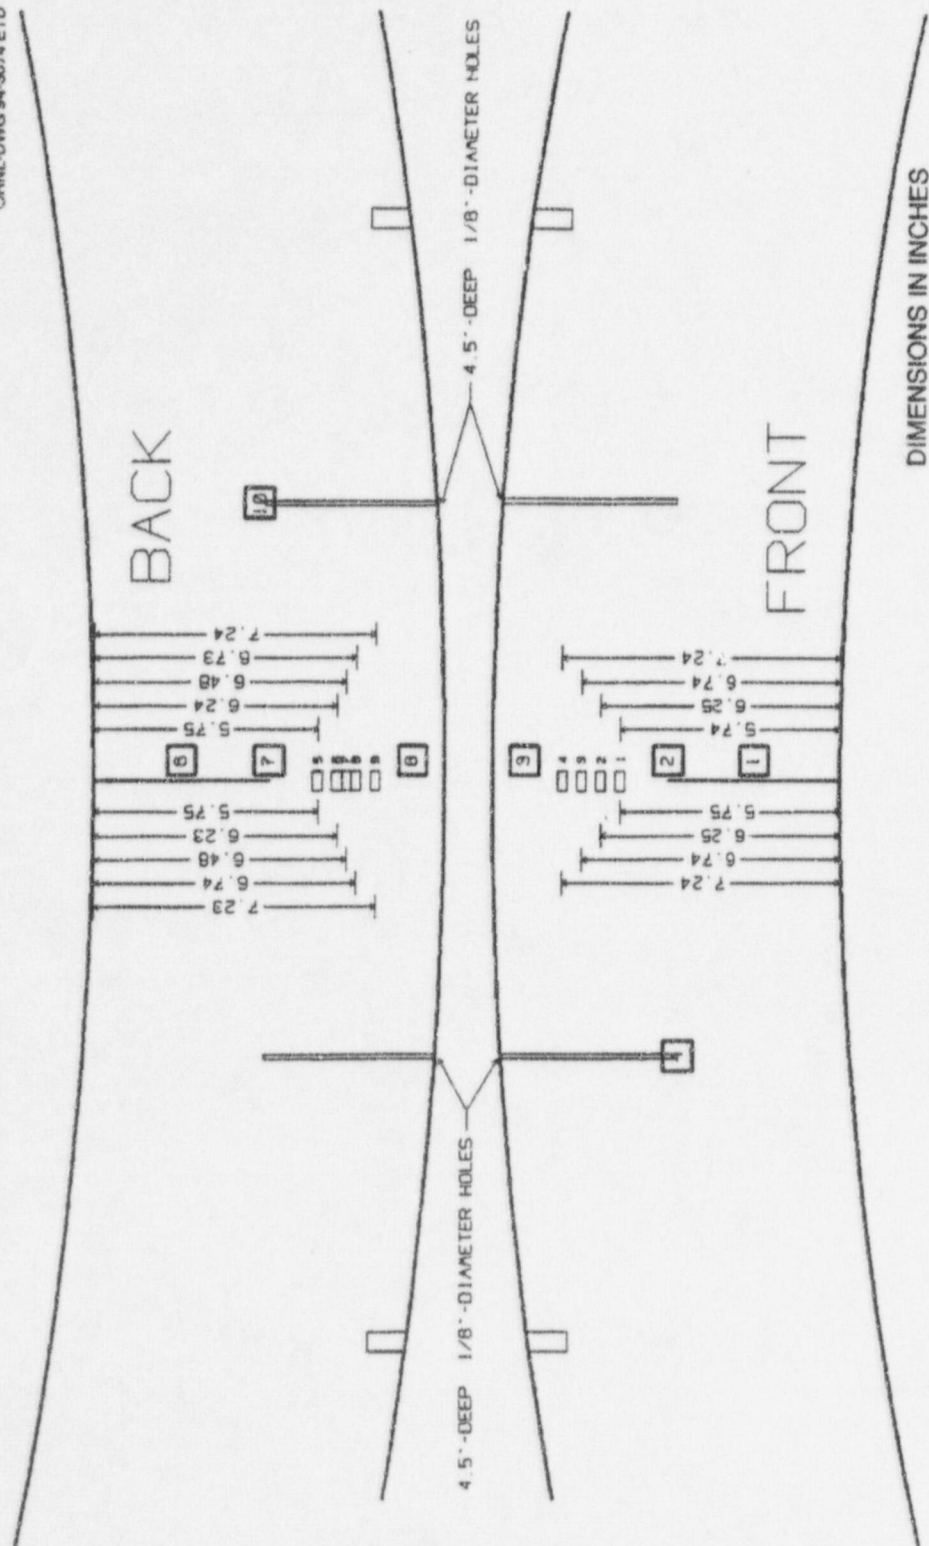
Strain gage layout for clad beam specimen CB-1.1.
